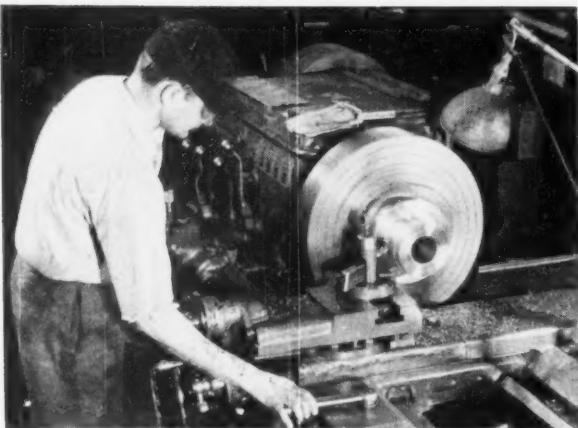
Lewis Foundry's machinists are carefully trained on the job in good carbide tooling practice. Here, an operator turns out the male half of a coupling from cast steel, using a standard Carbolyt tool, Grade 788.
